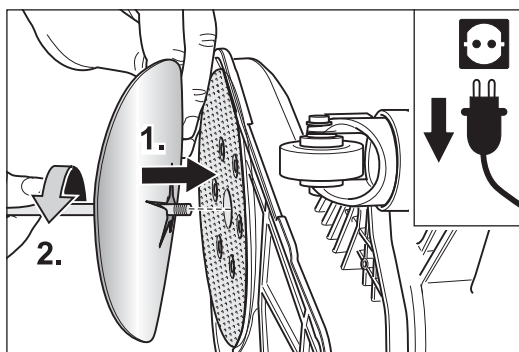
Mount the new sanding disc (1.) and tighten the screw (2.).
